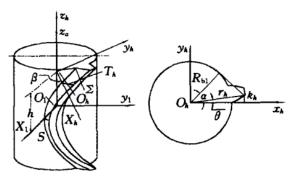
Tooth profile of cylindrical gears with arcuate tooth trace
